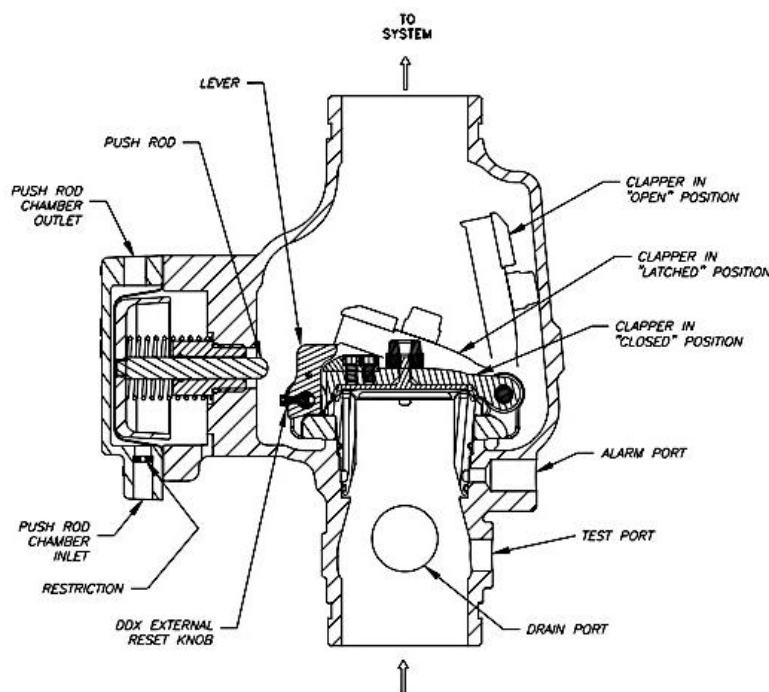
Cross-Sectional View of the DDX Deluge Valve
